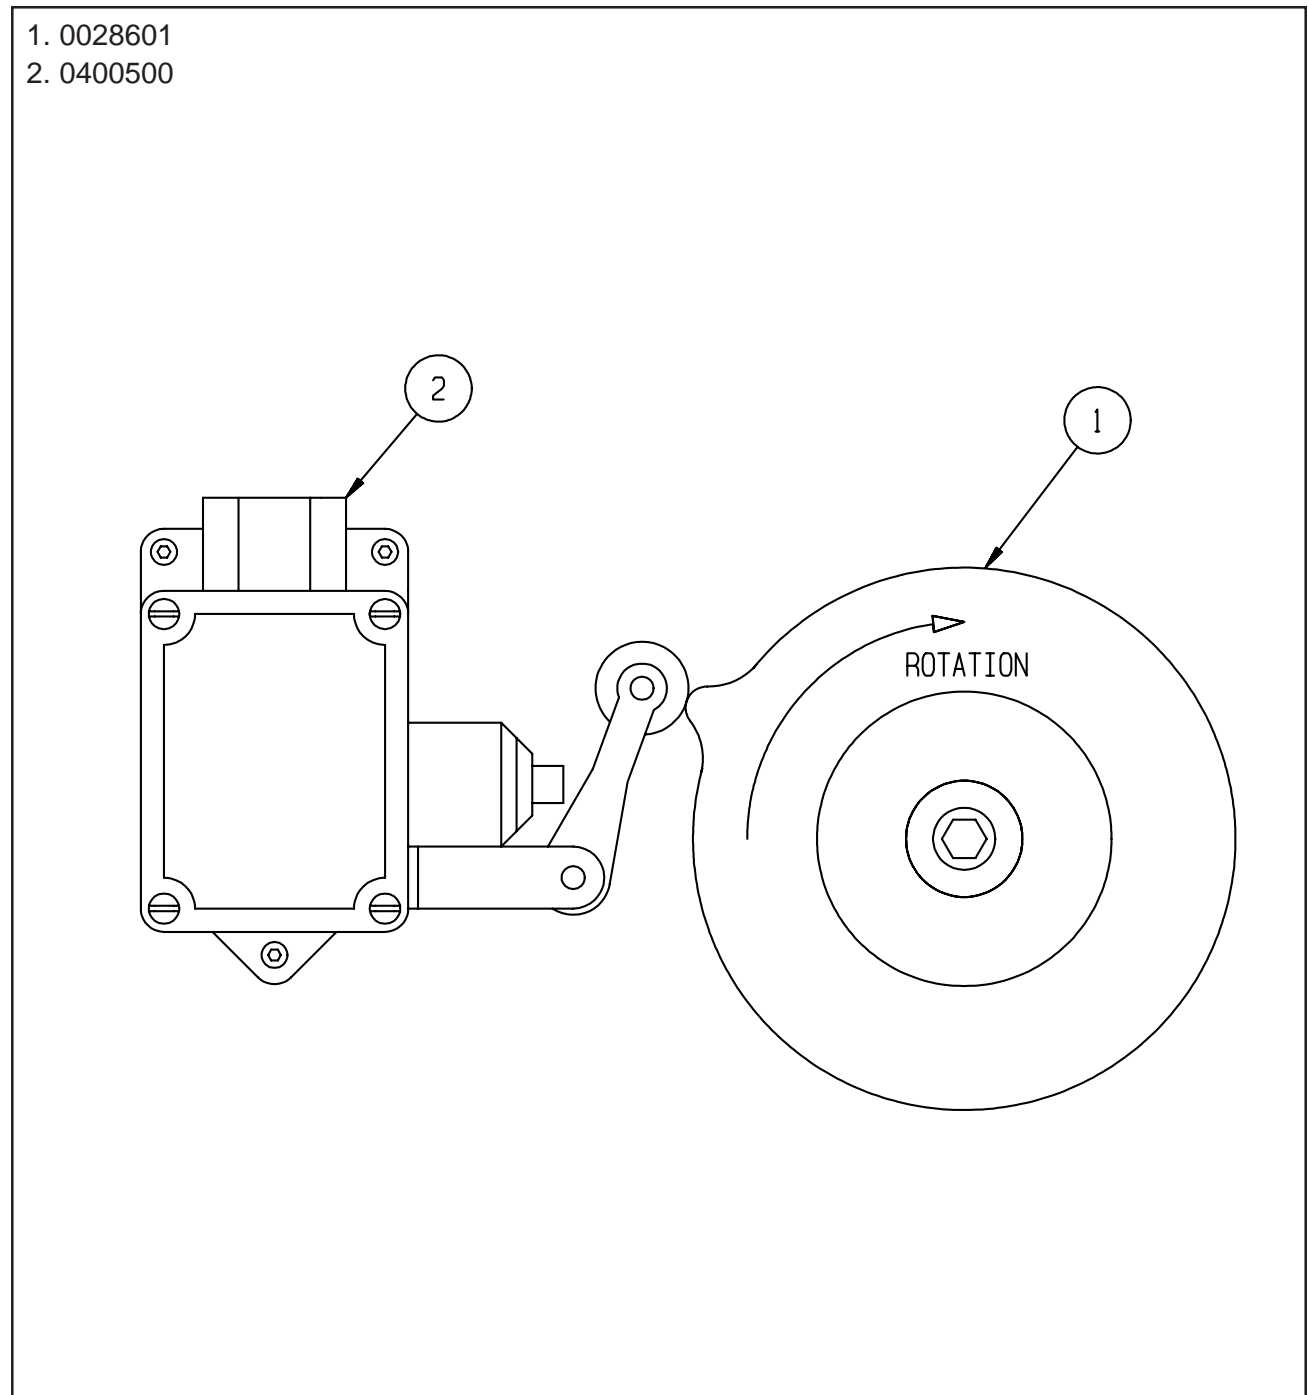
Adjust Machine Stop Micro Switch Cam
